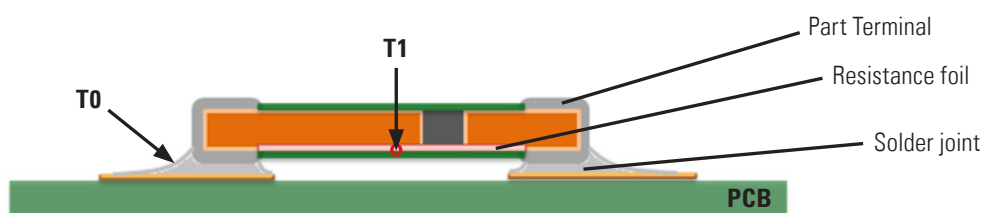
Cross-section view of an ISA-PLAN resistor type VMS soldered on a PCB
